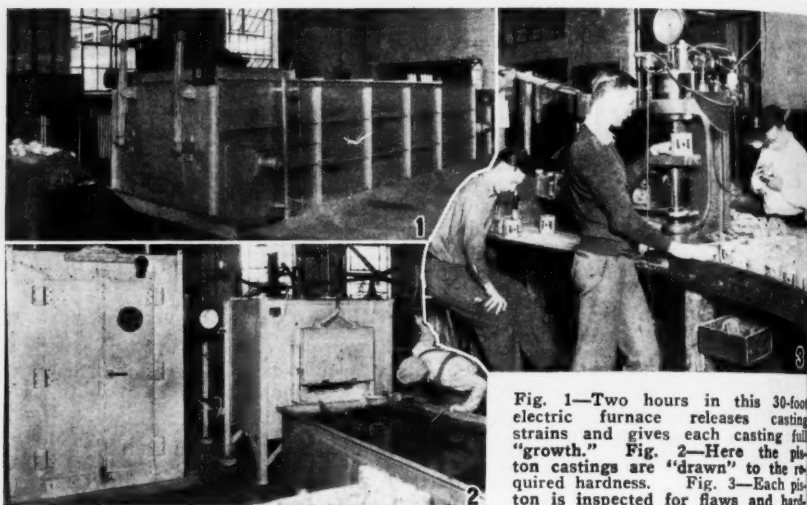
Two hours in this 30-foot electric furnace releases casting strains and gives each casting full "growth." Fig. 2—Here the piston castings are "drawn" to the required hardness. Fig. 3—Each piston is inspected for flaws and hardness.
